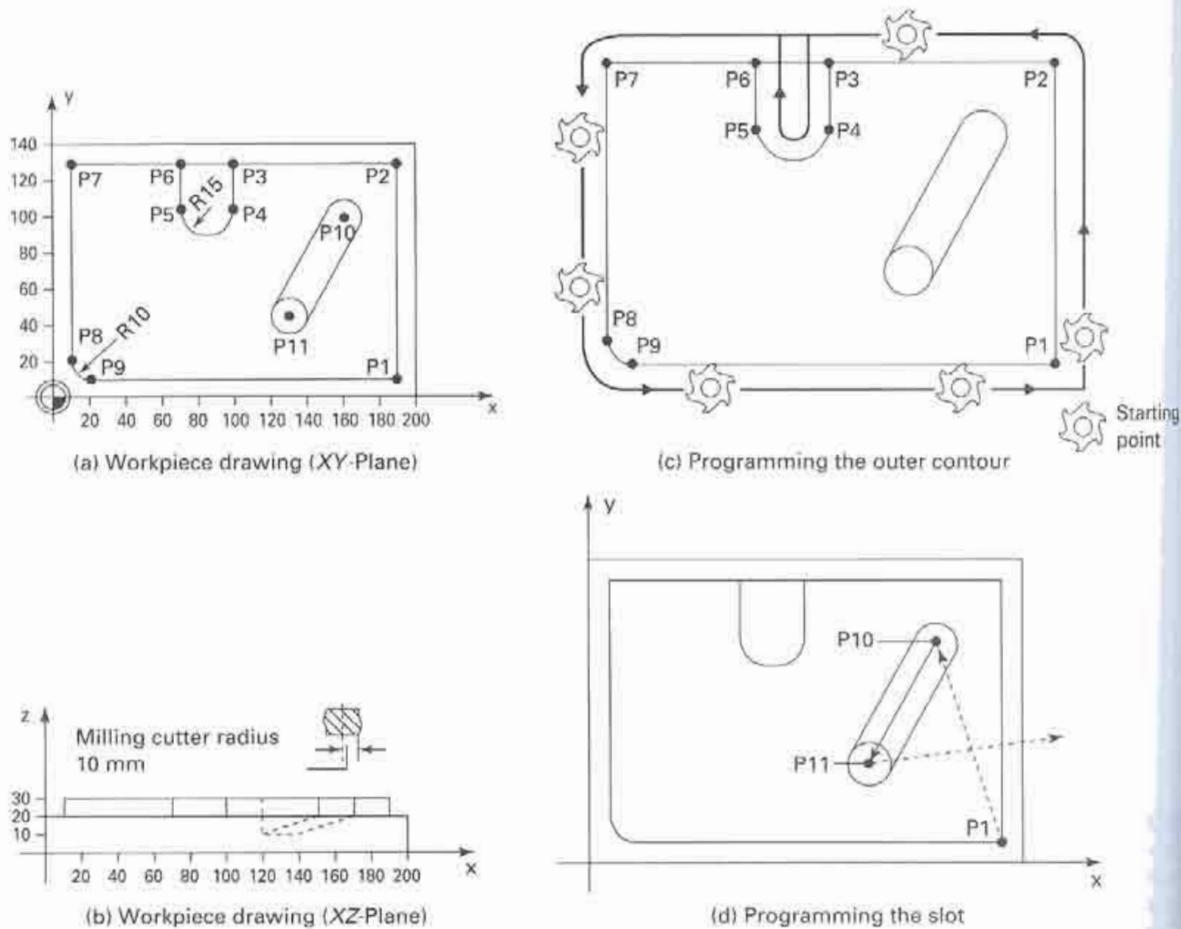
Example of programming a part in a vertical-spindle NC machine.
